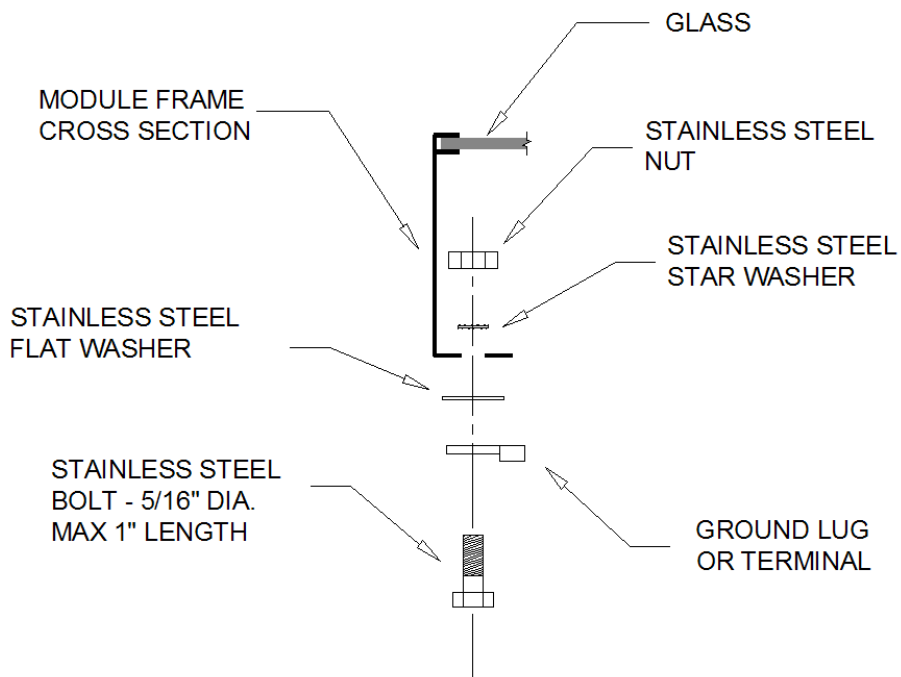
Using a Mounting Hole with Ground Lug or Terminal
